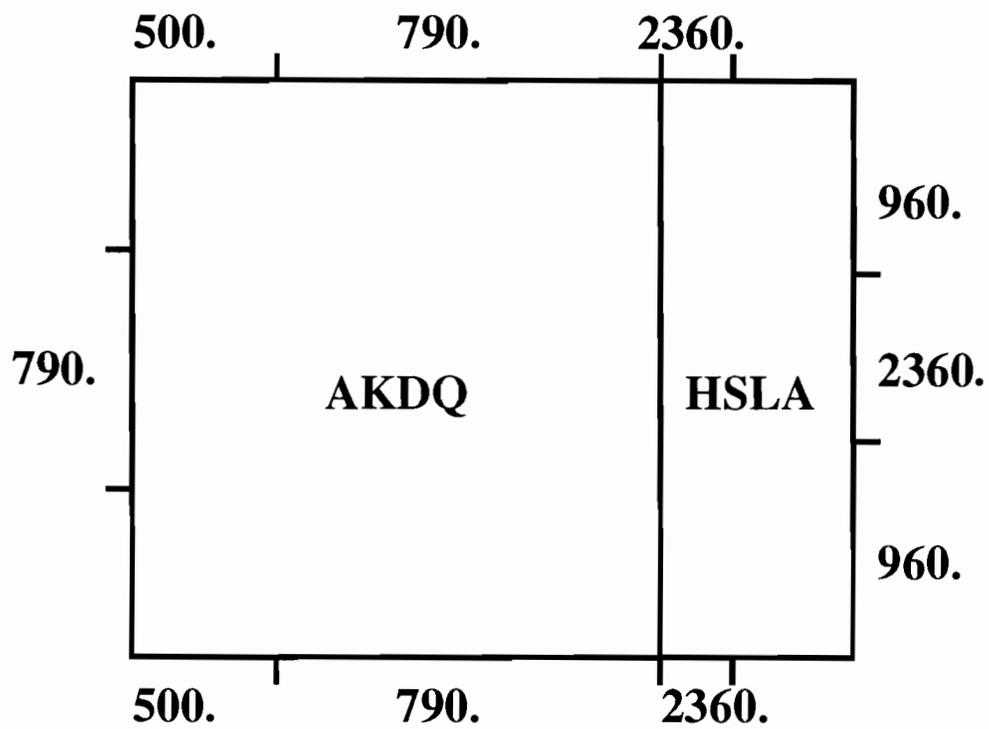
The restraining forces used for the blank with the weld 4" from center, lubricated conditions calculated based on Stoughton's drawbead model and binder force.
